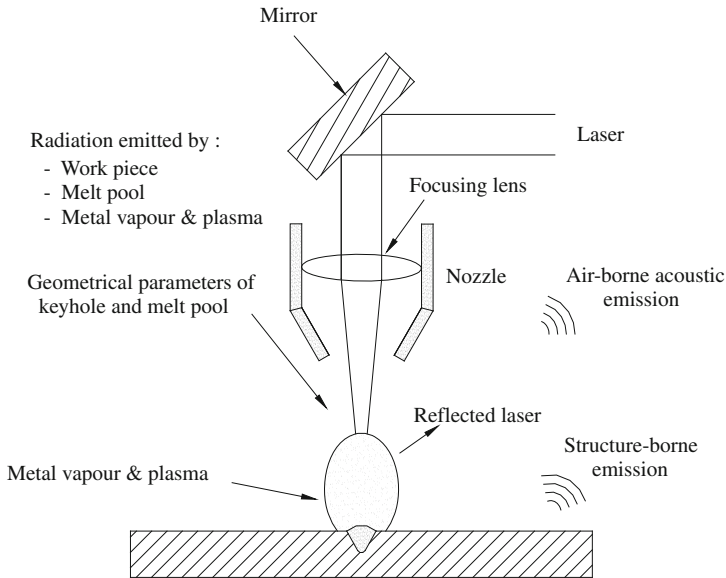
Signals emitted during laser welding process [38]
